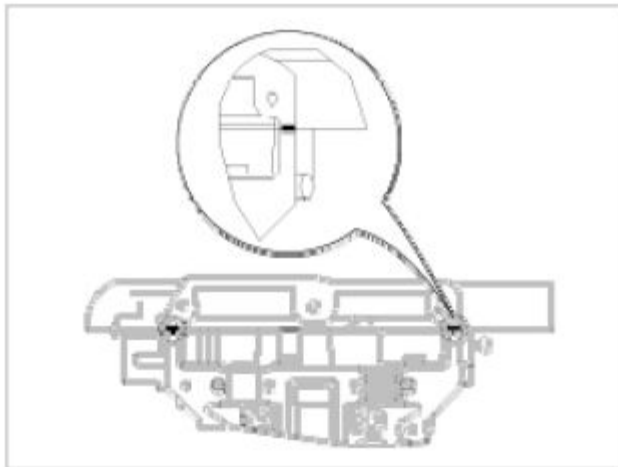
Identifying RH Cylinder Head Cover Sealant Applying Area
